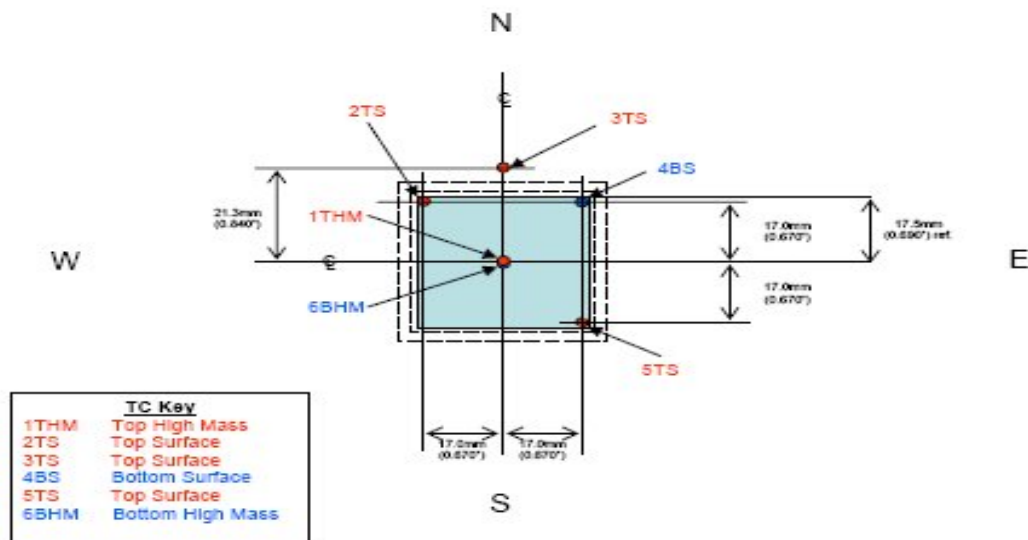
Rework Machine Temperature Measurement Equipment Thermocouple Locations
